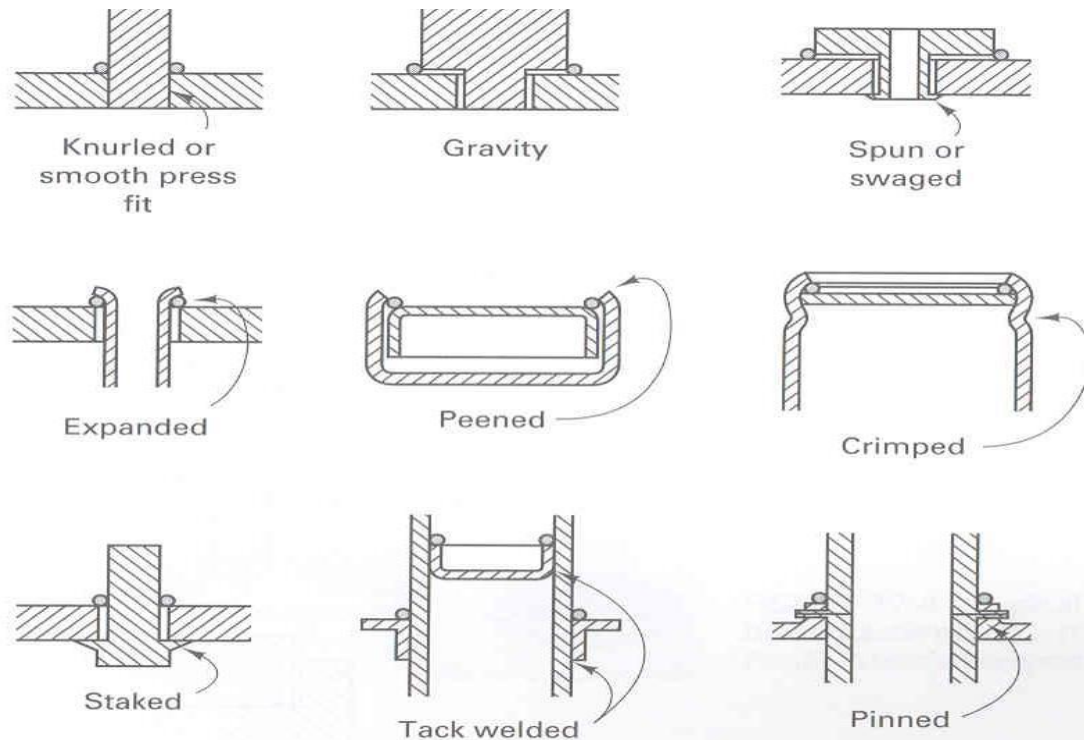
Methods of applying braze metal and positioning or fixturing various joints.
